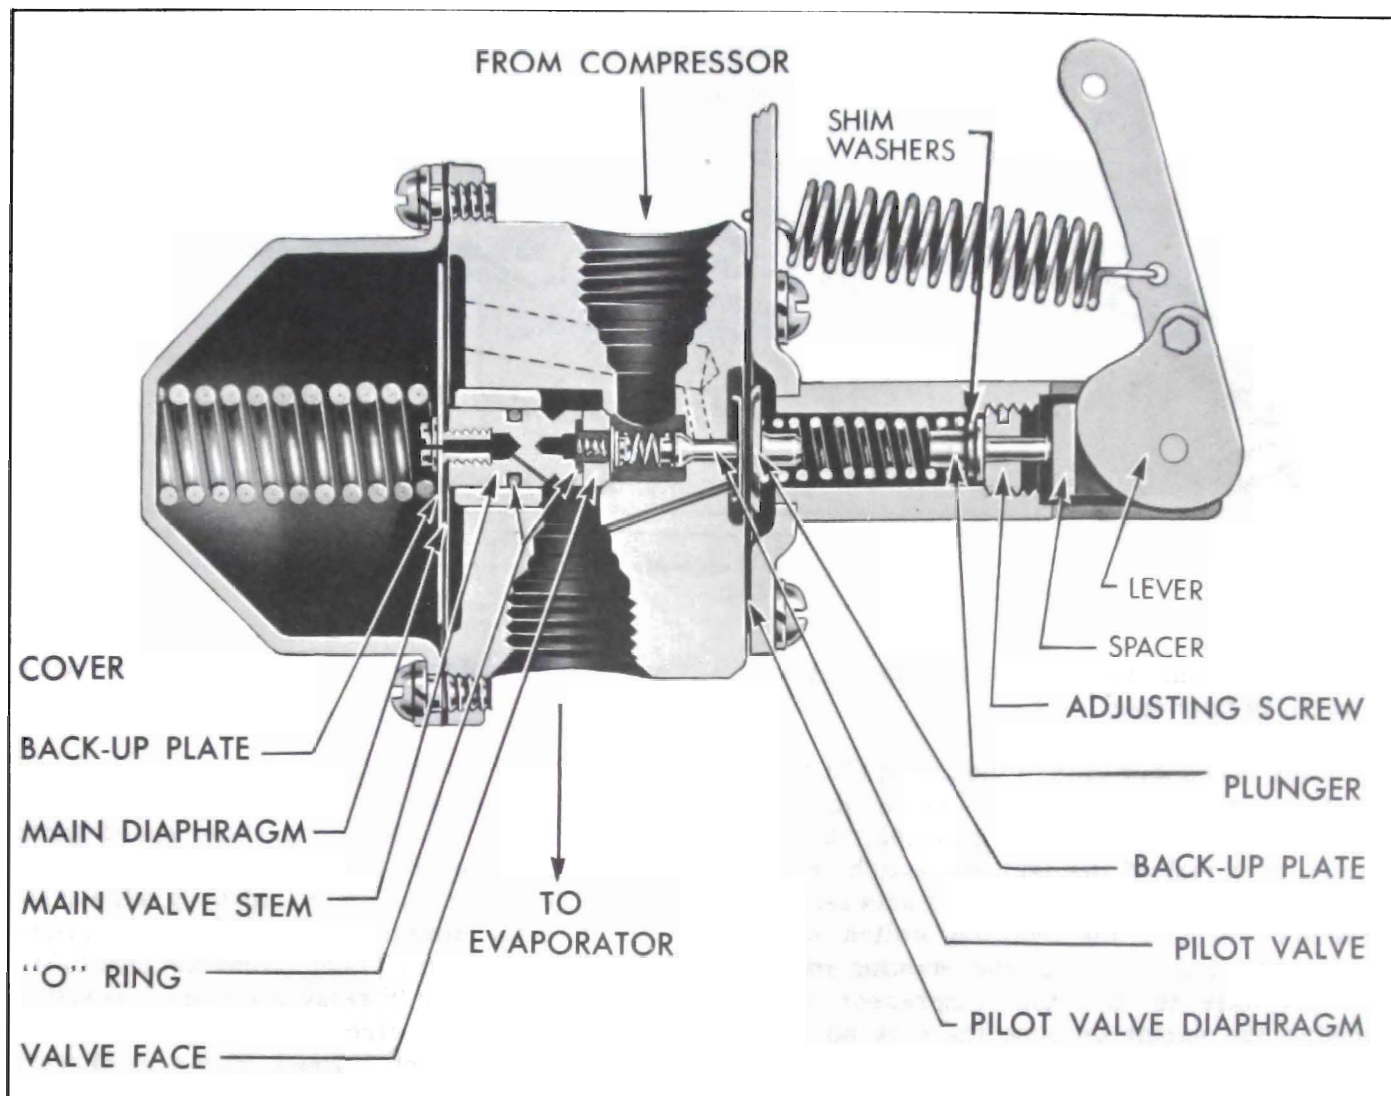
Hot Gas By-Pass Valve - Sectional View
